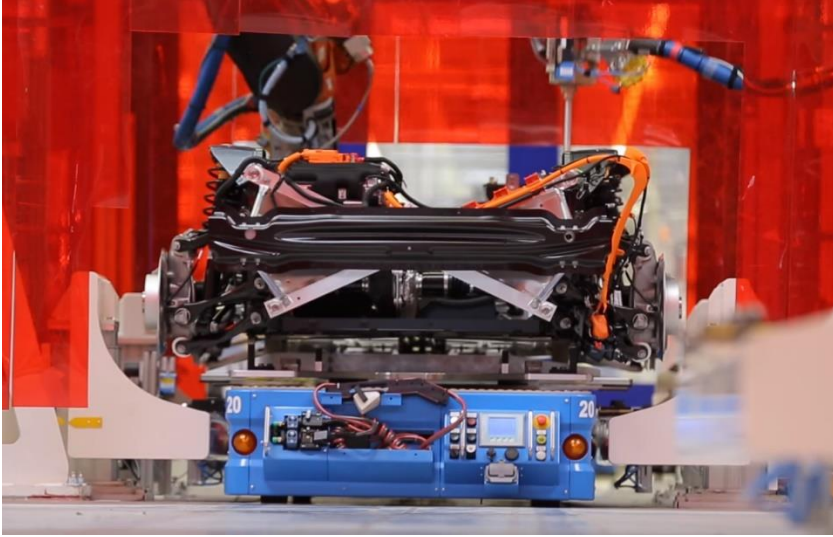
AGV brings chassis to machine for inspection (Physical: 7, Cognitive: 7)
